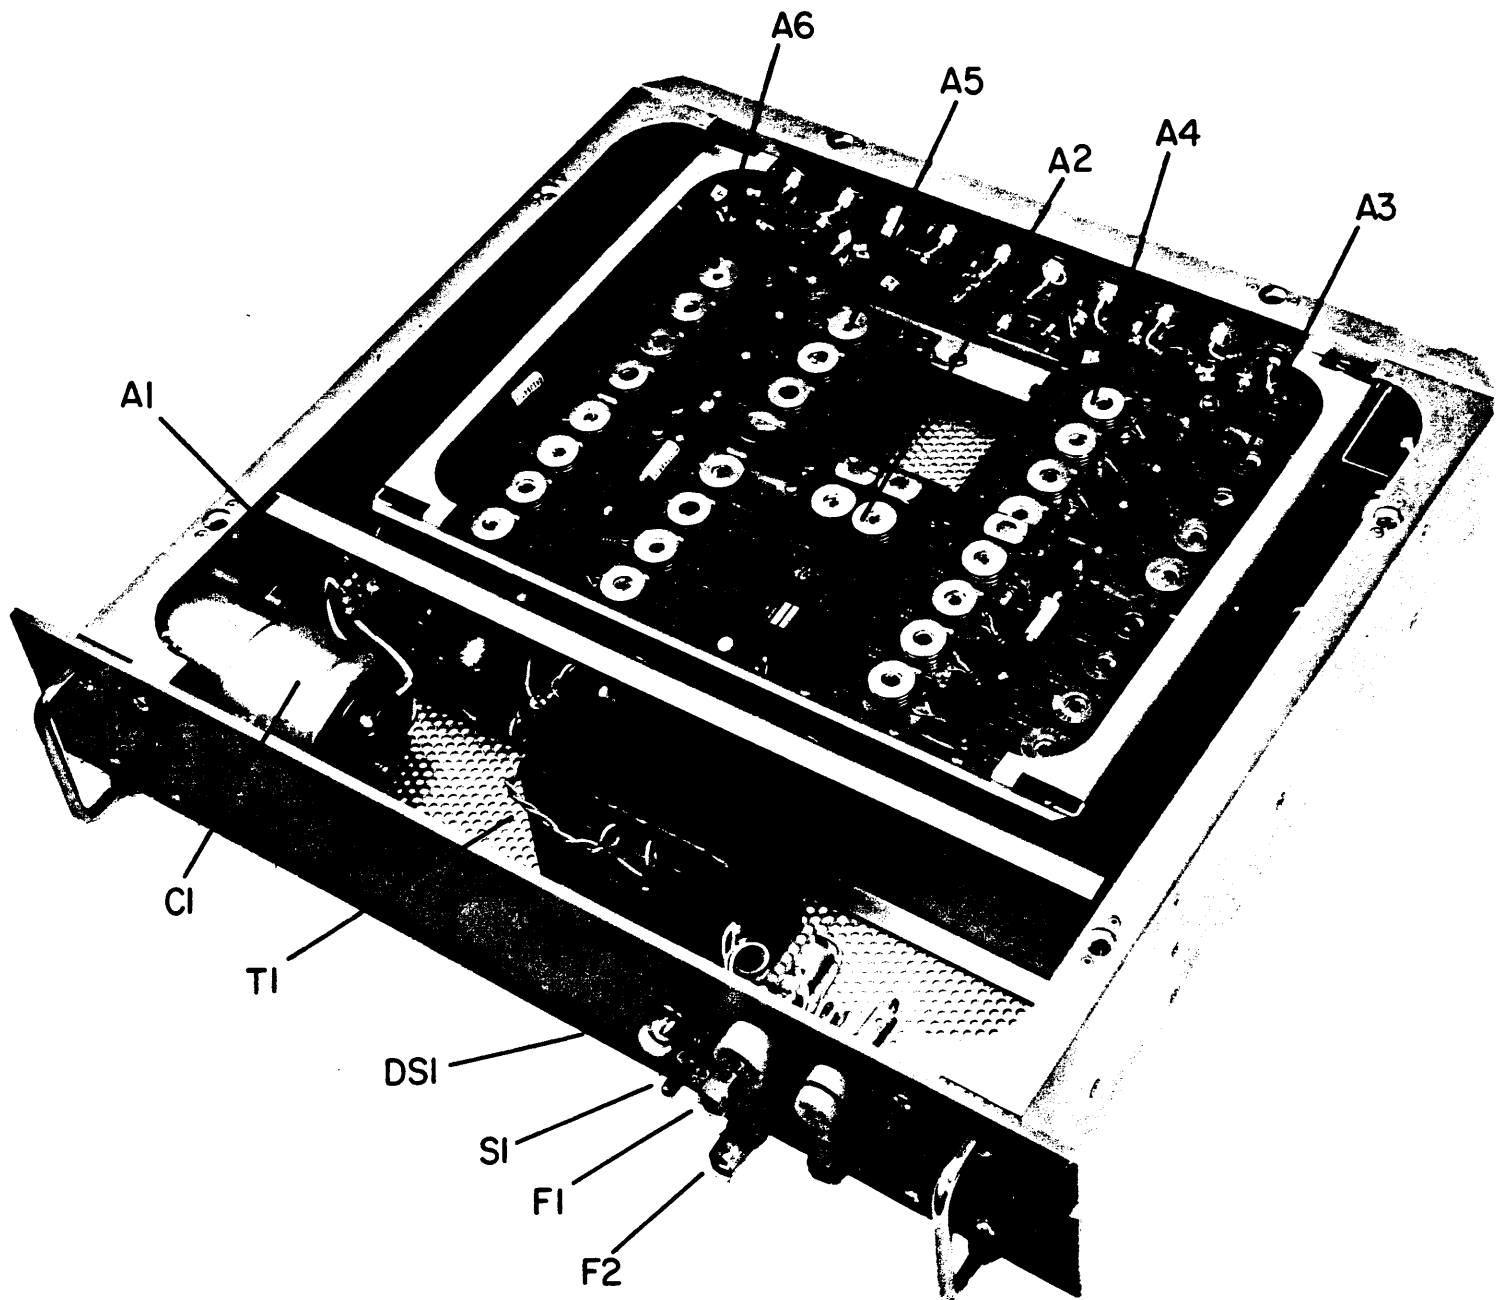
COMPONENT PARTS, MODEL AMC-32A
